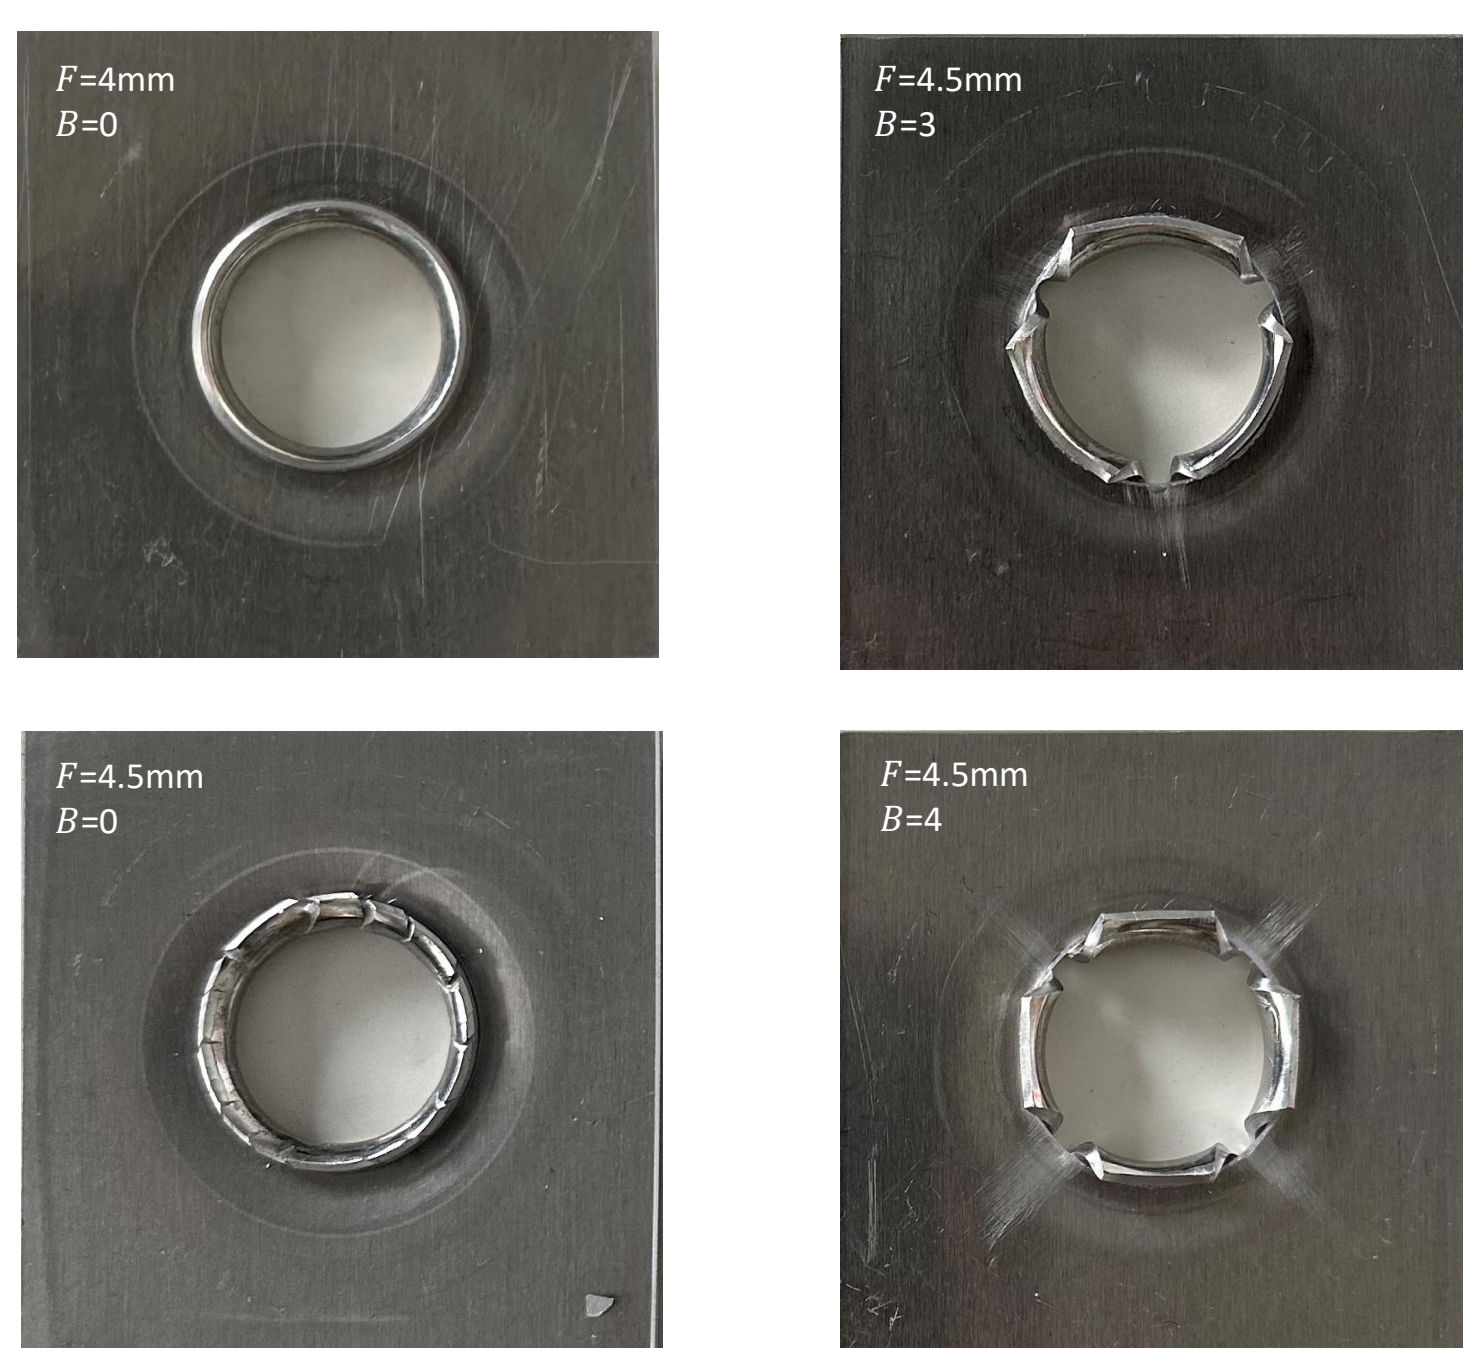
Hybrid hole-hemmed joints (HHH joints)
